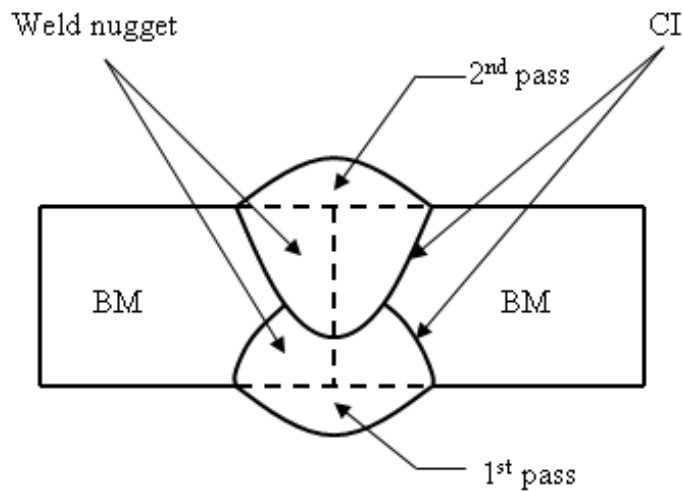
Schematic drawing showing a cross-section view of a butt weld joint geometry (BM = base metal, CI = cooling interface).
